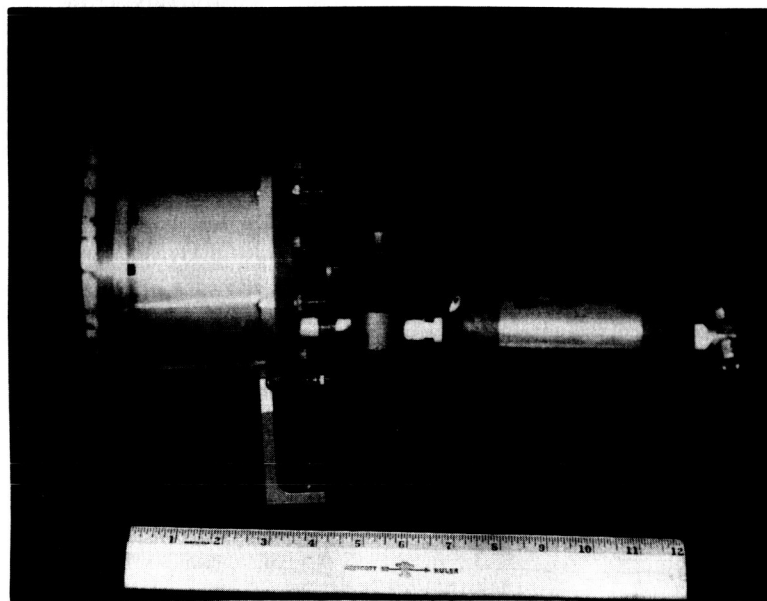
SIDE VIEW OF A THRUSTER ASSEMBLY
